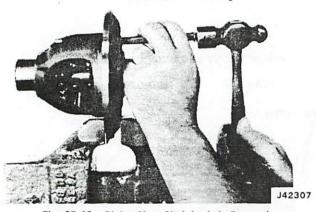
F-48 Pinion Mate Shaft Lockpin Removal
